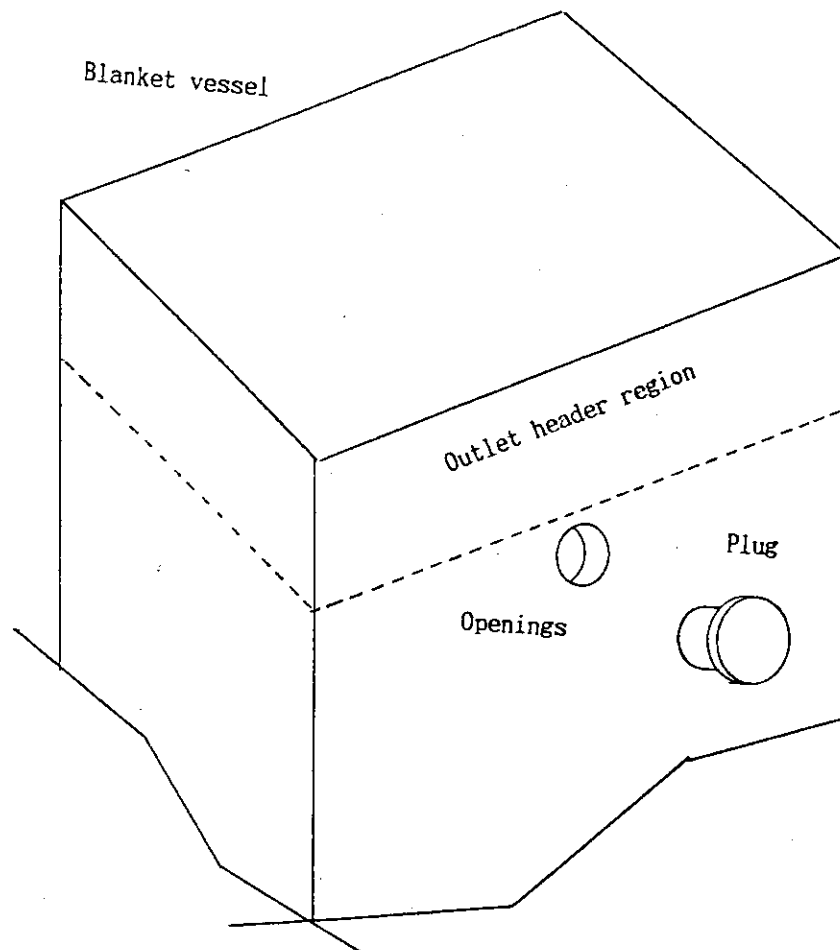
Opening in back wall of blanket vessel for pebble insertion
